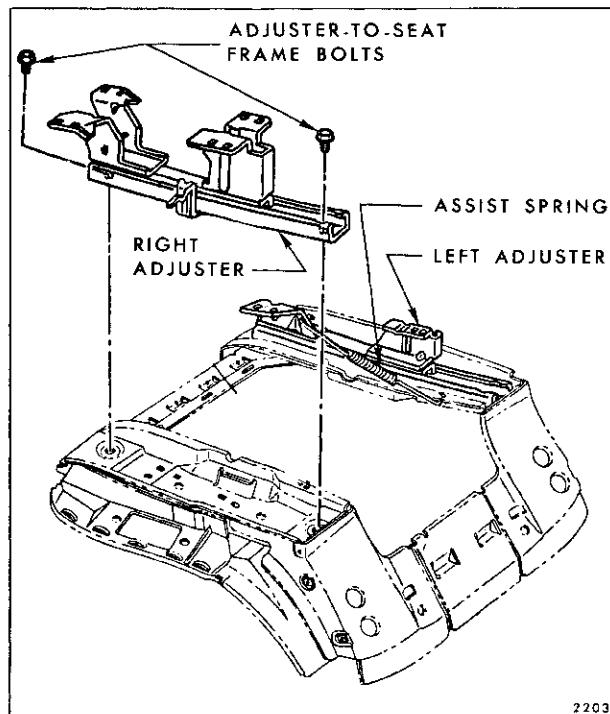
Manual Bucket Seat Adjuster Removal
